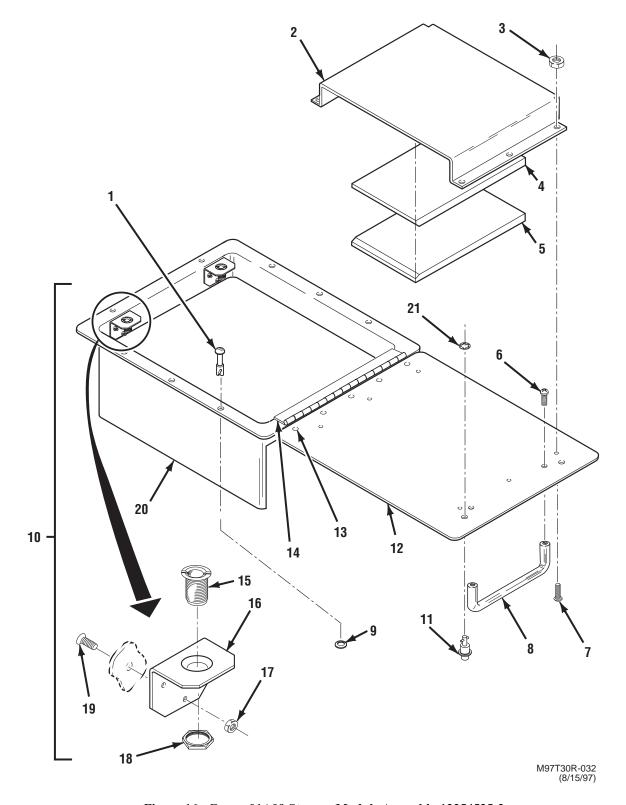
Group 01A09 Storage Module Assembly 12354535-2
